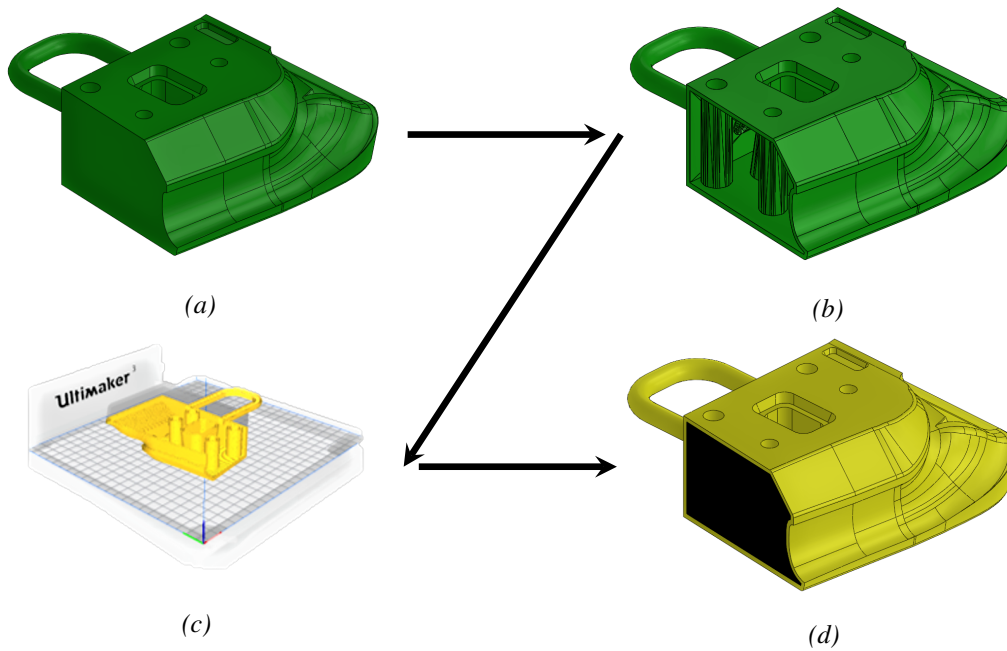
Manufacturing route of the proposed novel rapid tooling technique; (a) CAD model of tooling, (b) CAD model of tooling's shell, (c) additive layer manufacture of shell, and (d) filling of shell with epoxy resin.
